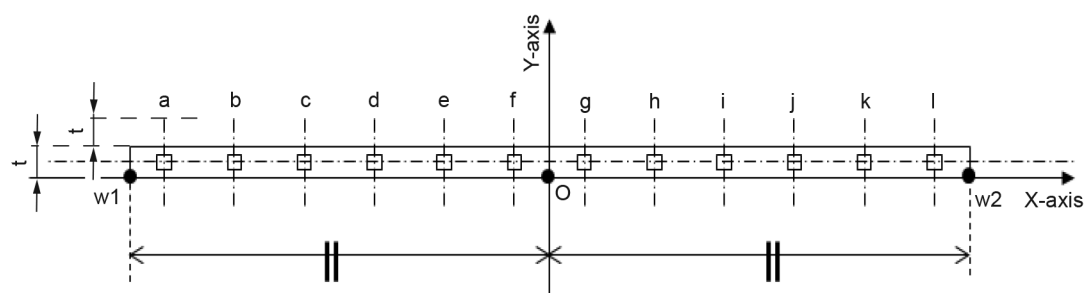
Expanded view of end-face for the twelve-core PMT body
